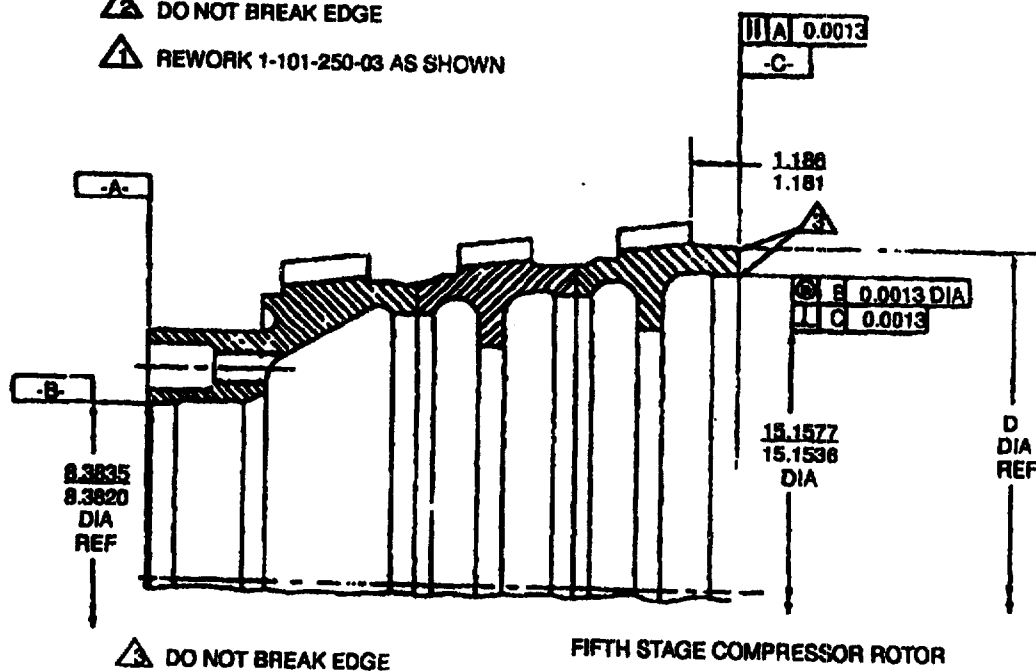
Removal of Damaged Compressor Rotor Stages (Metric) (Sheet 1 of 2).
